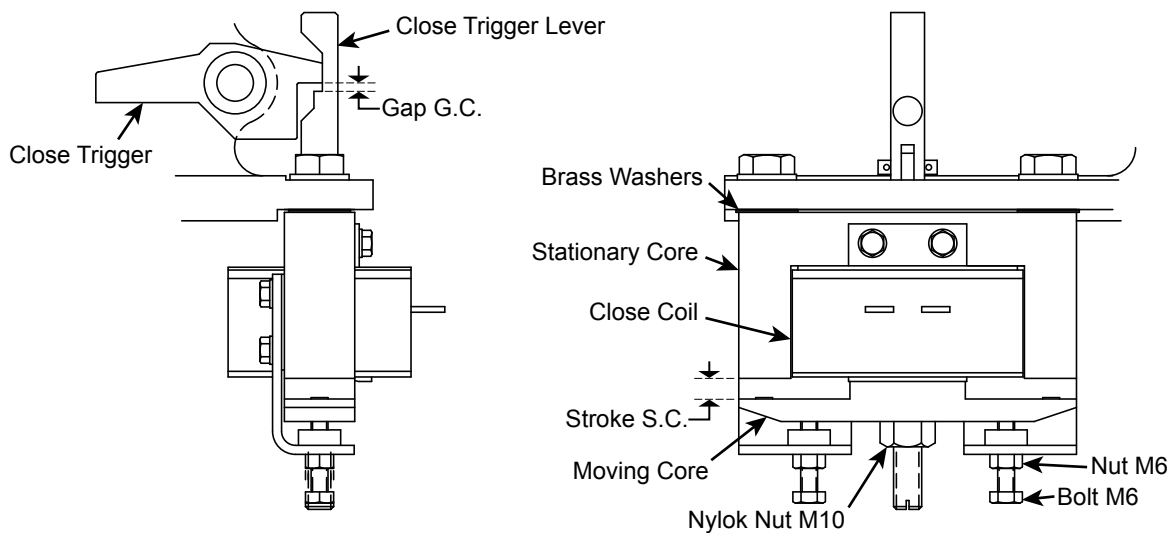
Close Coil Assembly (3040) Settings
